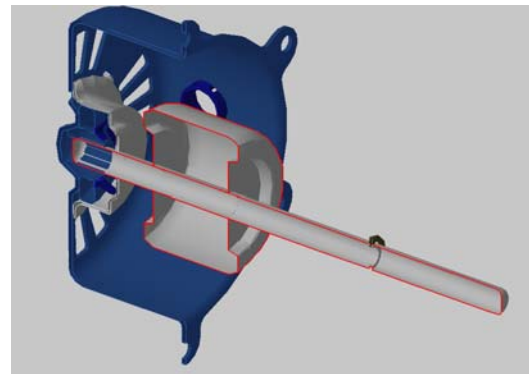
Shaft and Rotor turn red as the Shaft is press fit into the Rotor hole
